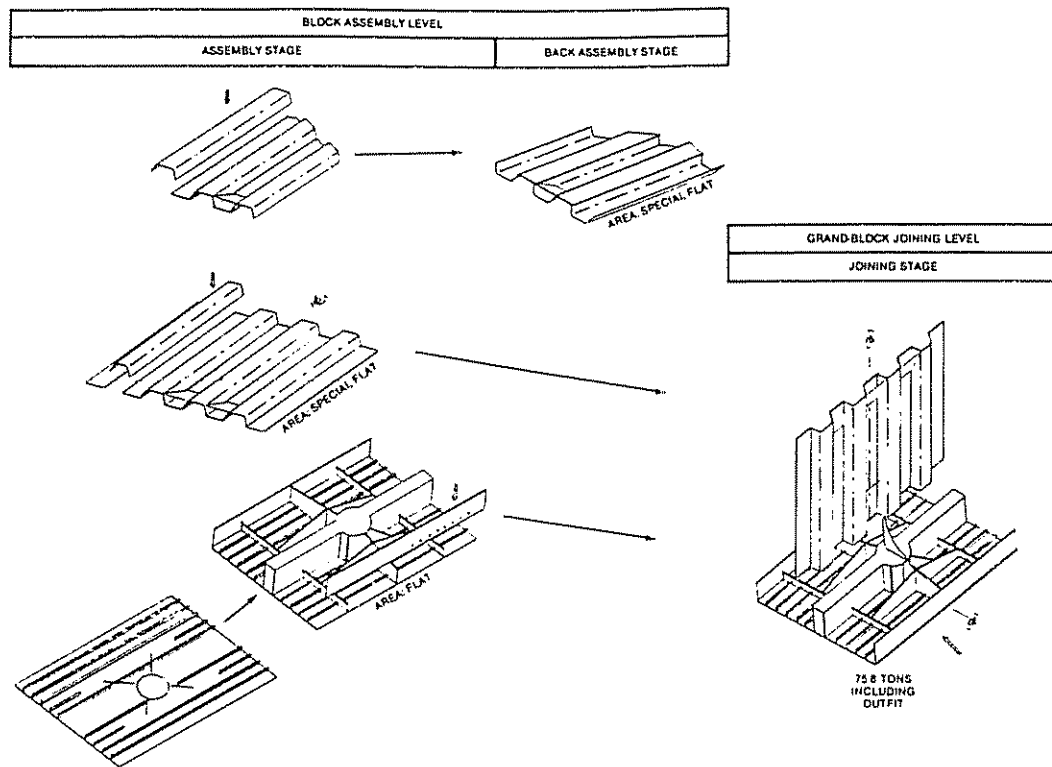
Block assembly and grand-block joining, showing a corrugated transverse bulkhead and a deck center between cargo holds
